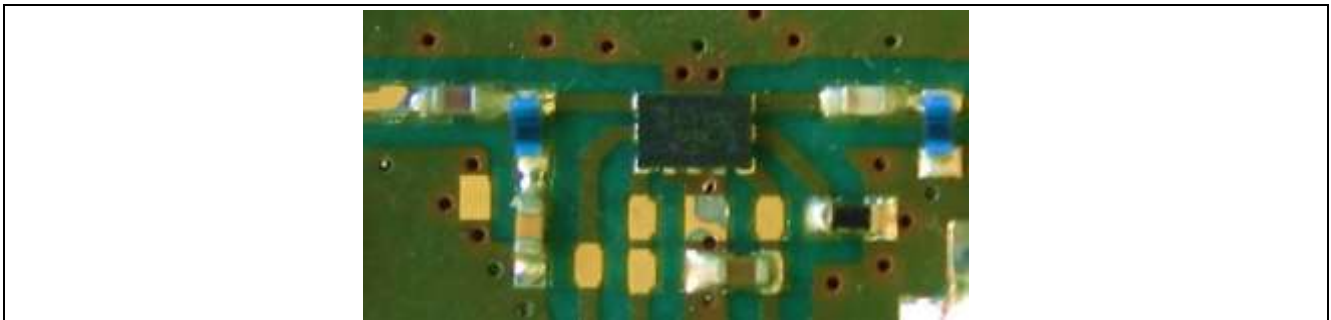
Picture of Evaluation Board (Detailed View) of BGA751N7 V1.0
